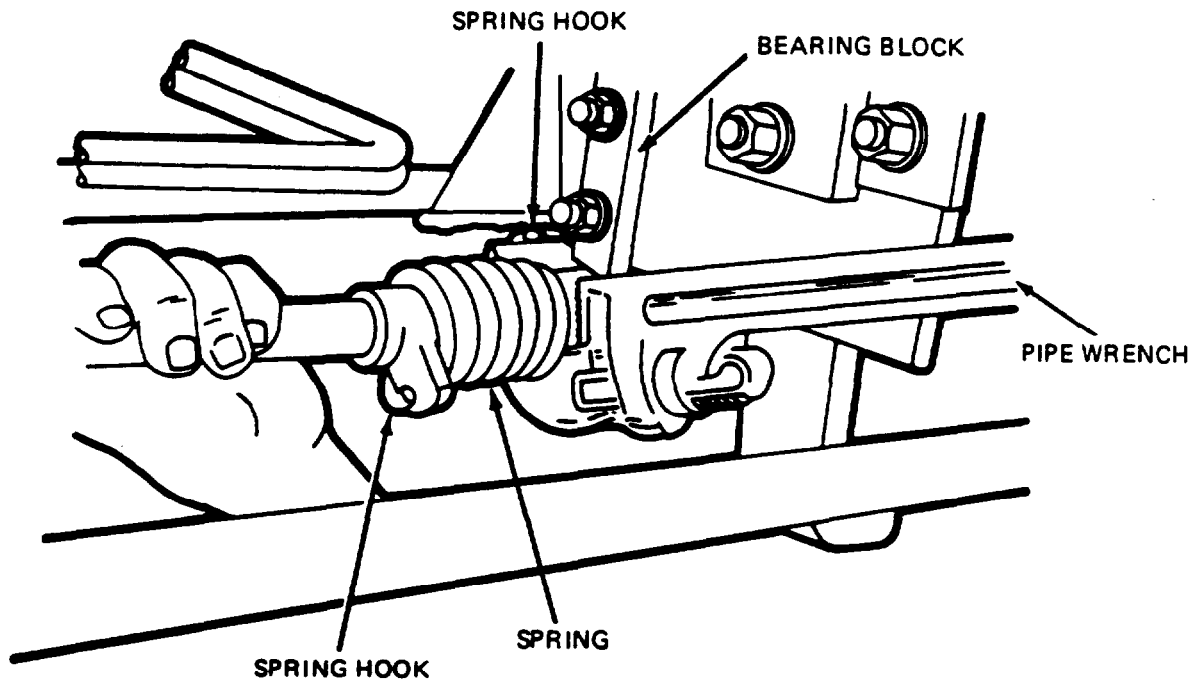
Disassemble/Assemble Subframe (Sheet 2 of 2).
